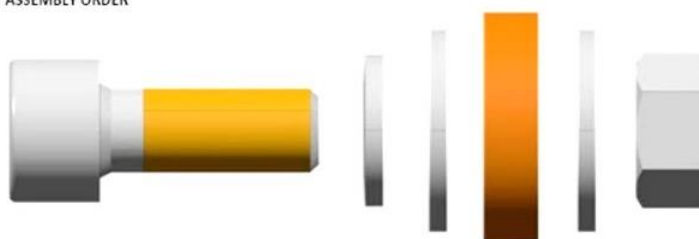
Types of materials and metal coatings of components in the clamping joint
